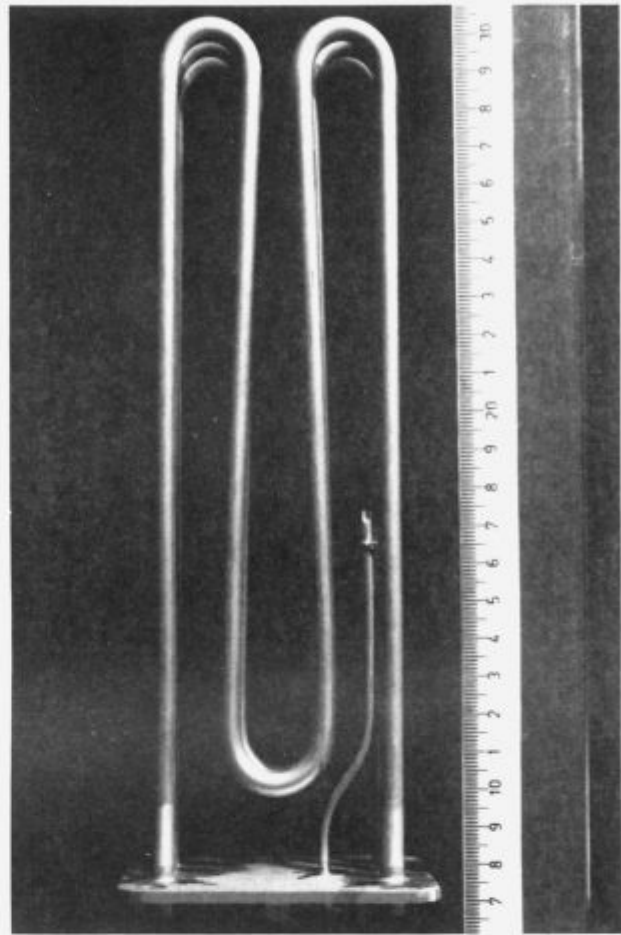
Vacuum brazing of boiler heating elements on the steel plate carrier.
